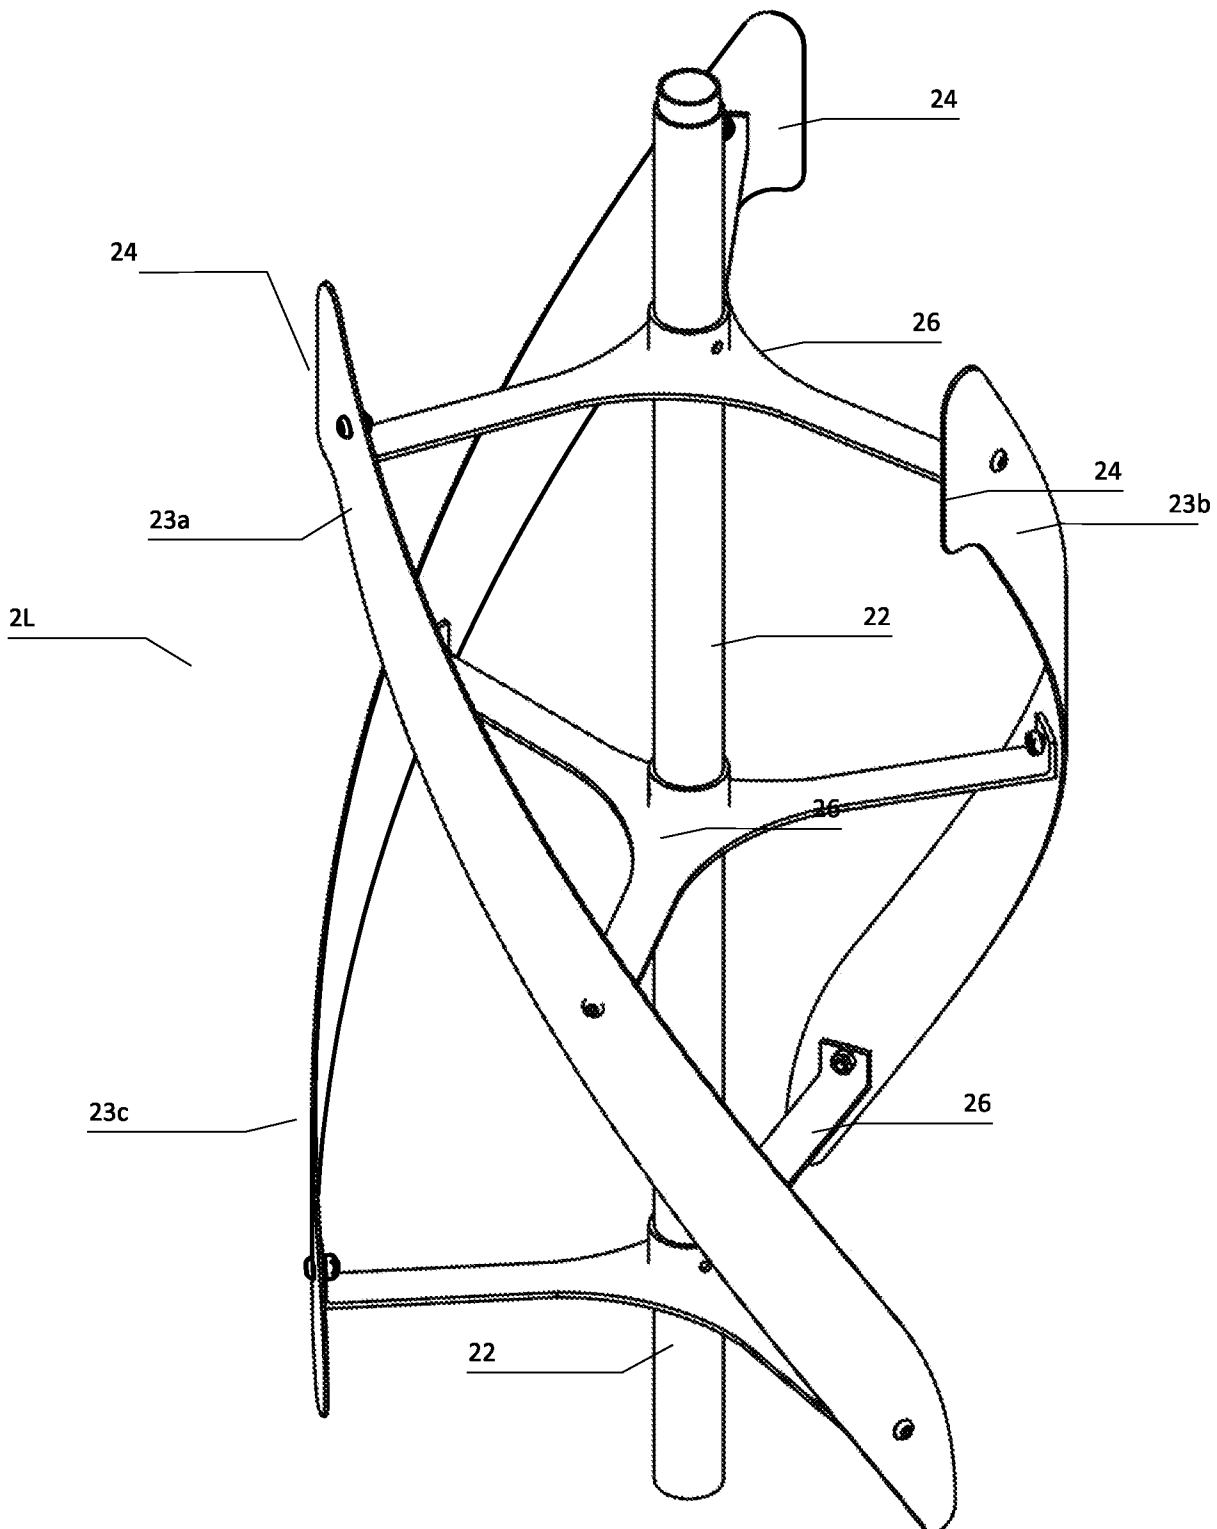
isometric "perspective" view of a wind turbine (2) of an embodiment of the invention, a Darrieus turbine with helical blades.
